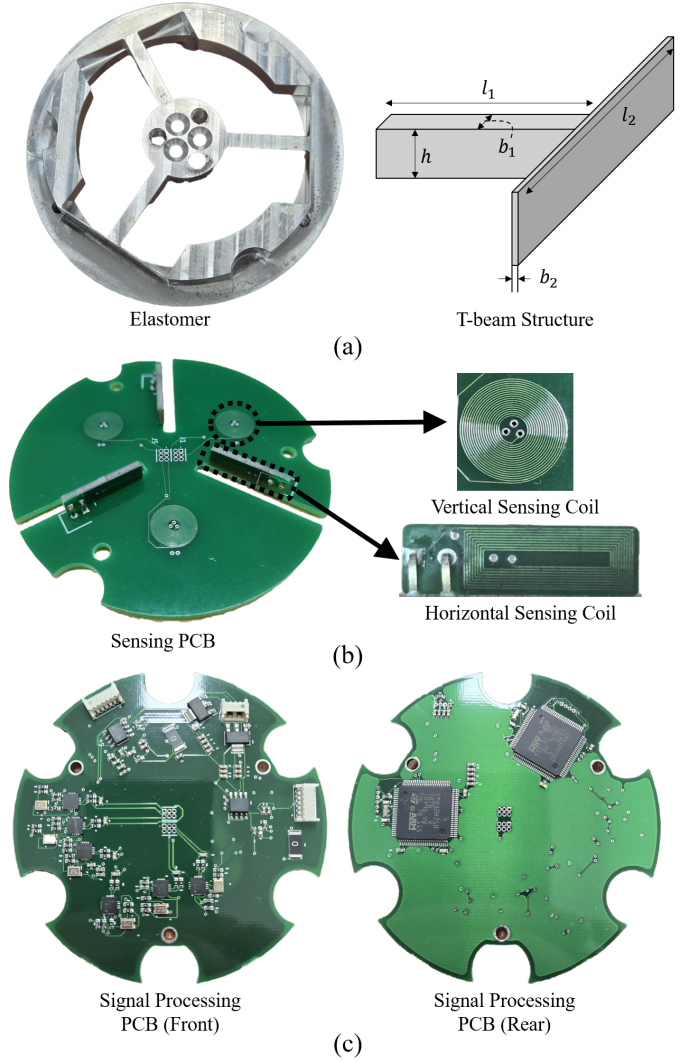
Elastomer and printed circuit board design (a) Elastomer and T-beam structure (b) Sensing PCB with vertical sensing coil and horizontal sensing coil (c) Signal processing PCB design
